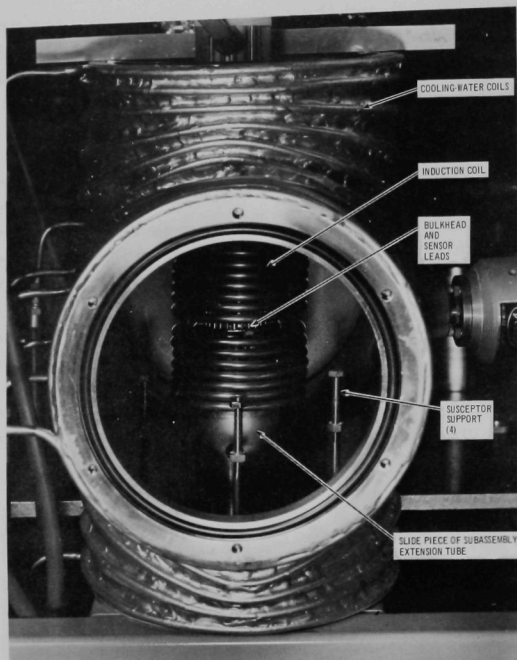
Drywell Bulkhead in Induction-heated Brazing Chamber of Brazing Furnace (viewing cover removed). ANL Neg. No. 113-1057A.
